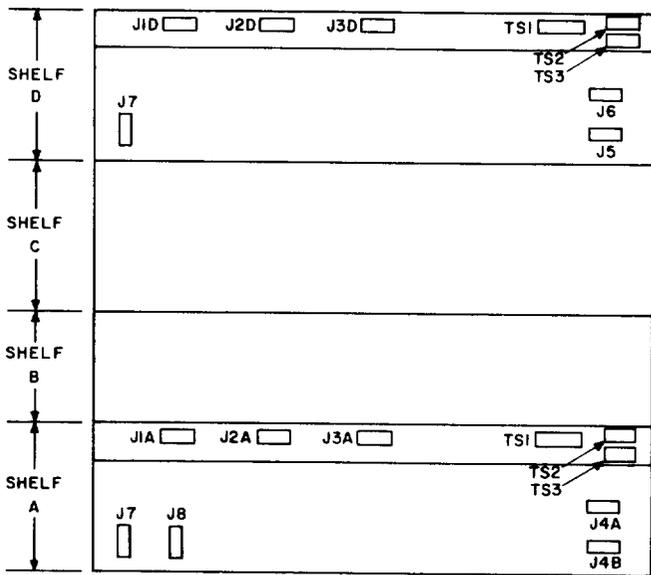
Rear View of LTS and T1DM Assembly (J70177AG)
